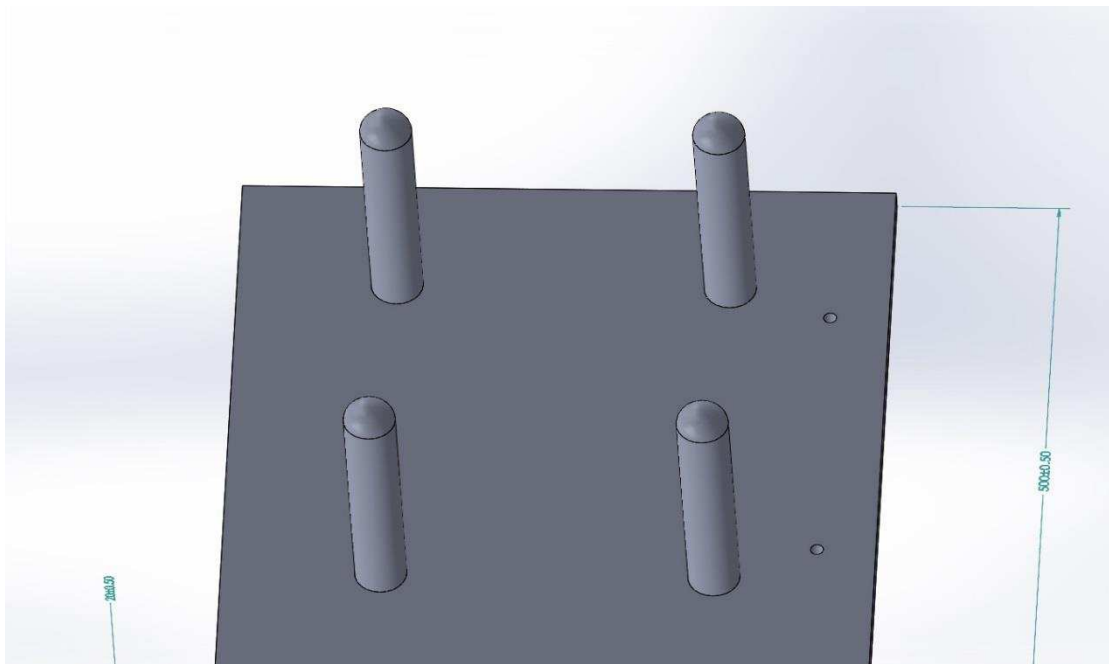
A: Base Plate (housing the motor and gearbox)
